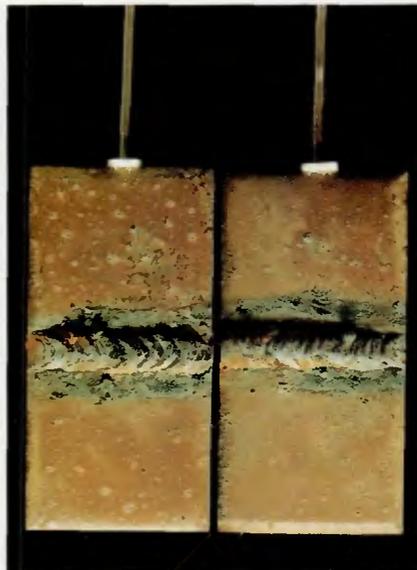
CA706 welded with 70-30 Cu-Ni with 14.1% iron dilution after 60-day exposure in quiet seawater
